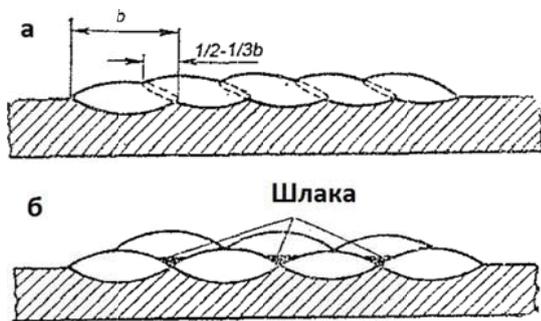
Technique of surface-welding, used for recovery of a toothed gear
